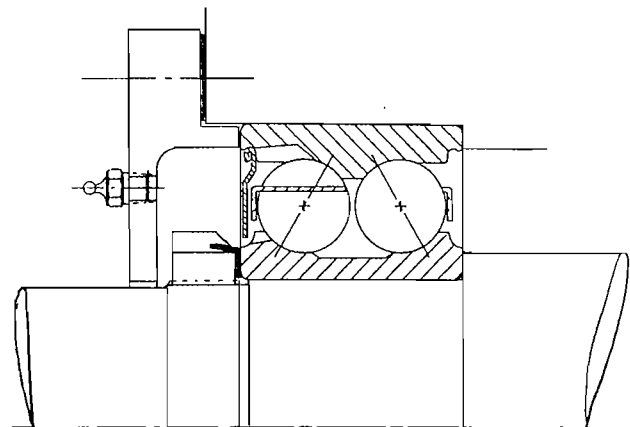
Grease Lubricated Double Row Bearing with Single Shield.
